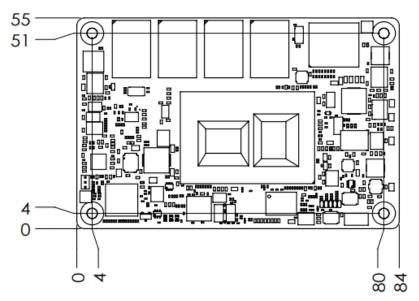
Pentium Series Board Mechanical Diagram – Front
